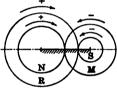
Compounded gears in fixed bearings Eq. 8 N's V = R's $V \times \frac{rm}{sn}$
